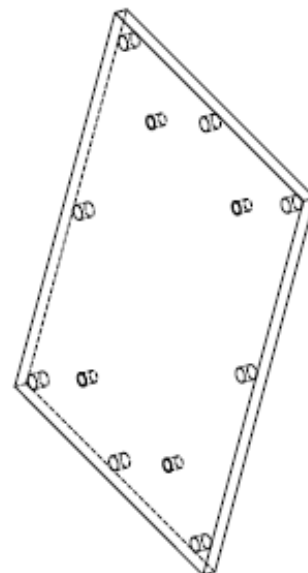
CAD drawing of the base of the bioreactor produced using the software package SolidWorks.
